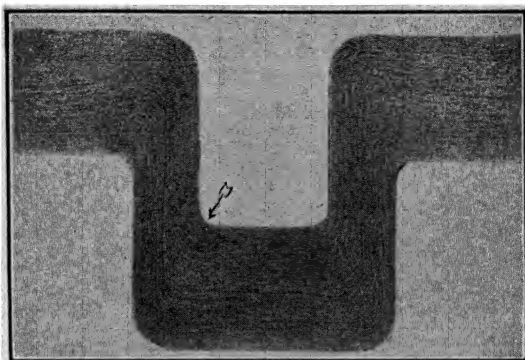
Machine-forged crankshaft showing “snaky” fiber.
